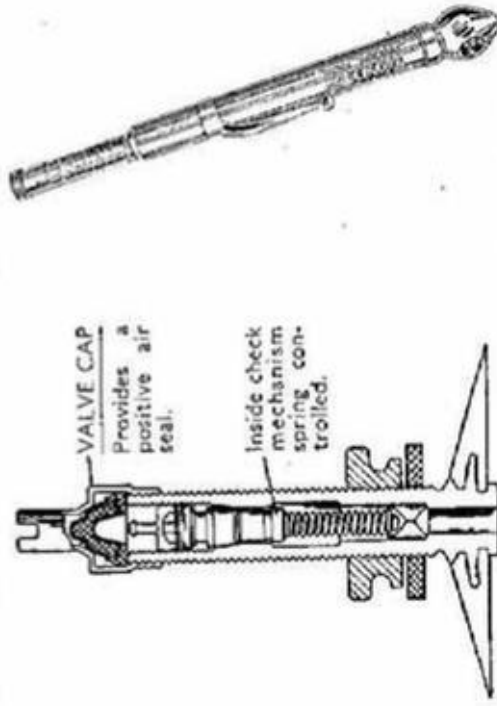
SHOWING INTERNAL DETAILS OF DUNLOP VALVE (LEFT) AND DUNLOP PENCIL TYPE No. 6 PRESSURE GAUGE (RIGHT)
